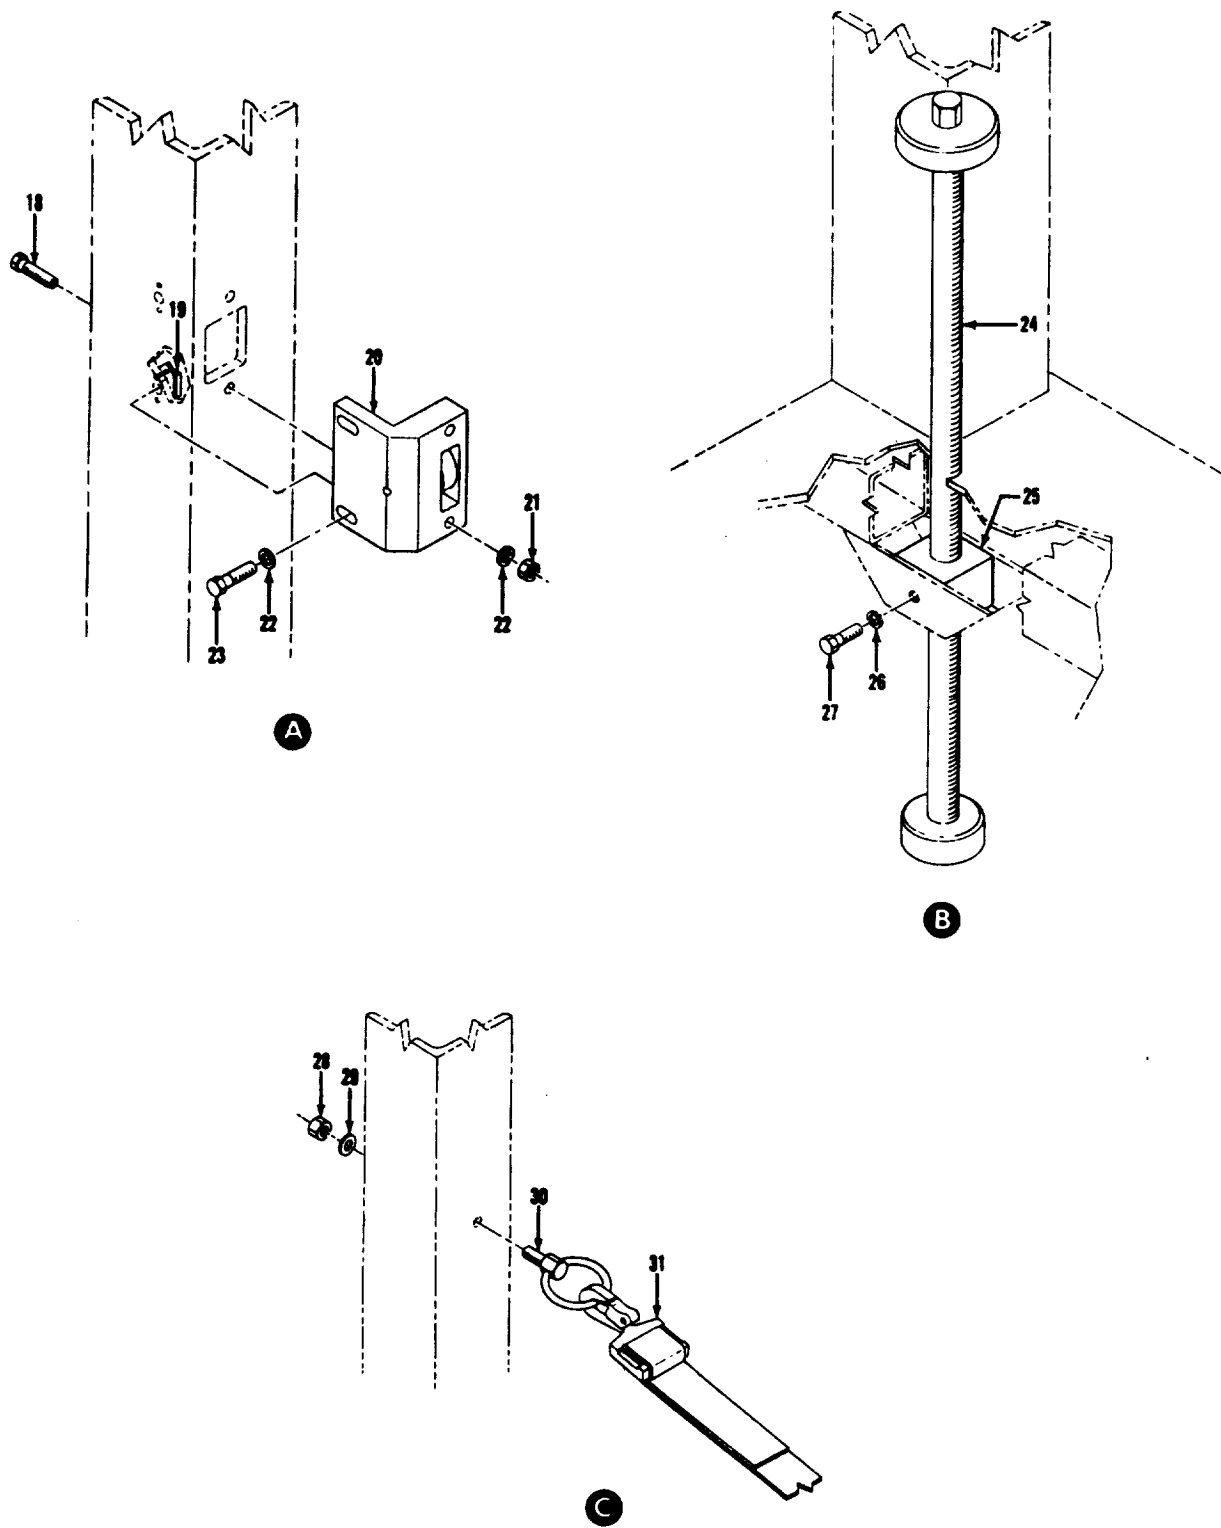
Hood Adapter Assembly (Sheet 2 of 6)
